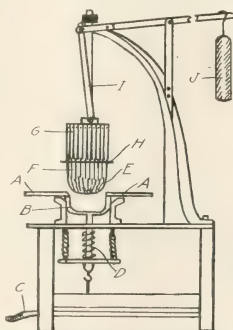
PLEATING AND FORMING MACHINE, CLOSED.
